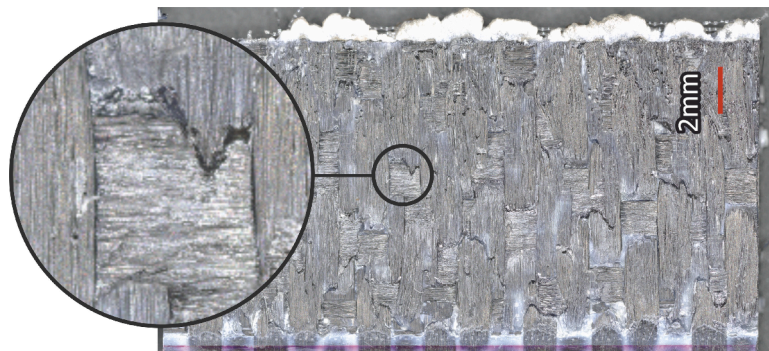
Fracture surface detail from Fig. 7 of continuous ultrasonic weld made using rounded sonotrode.
